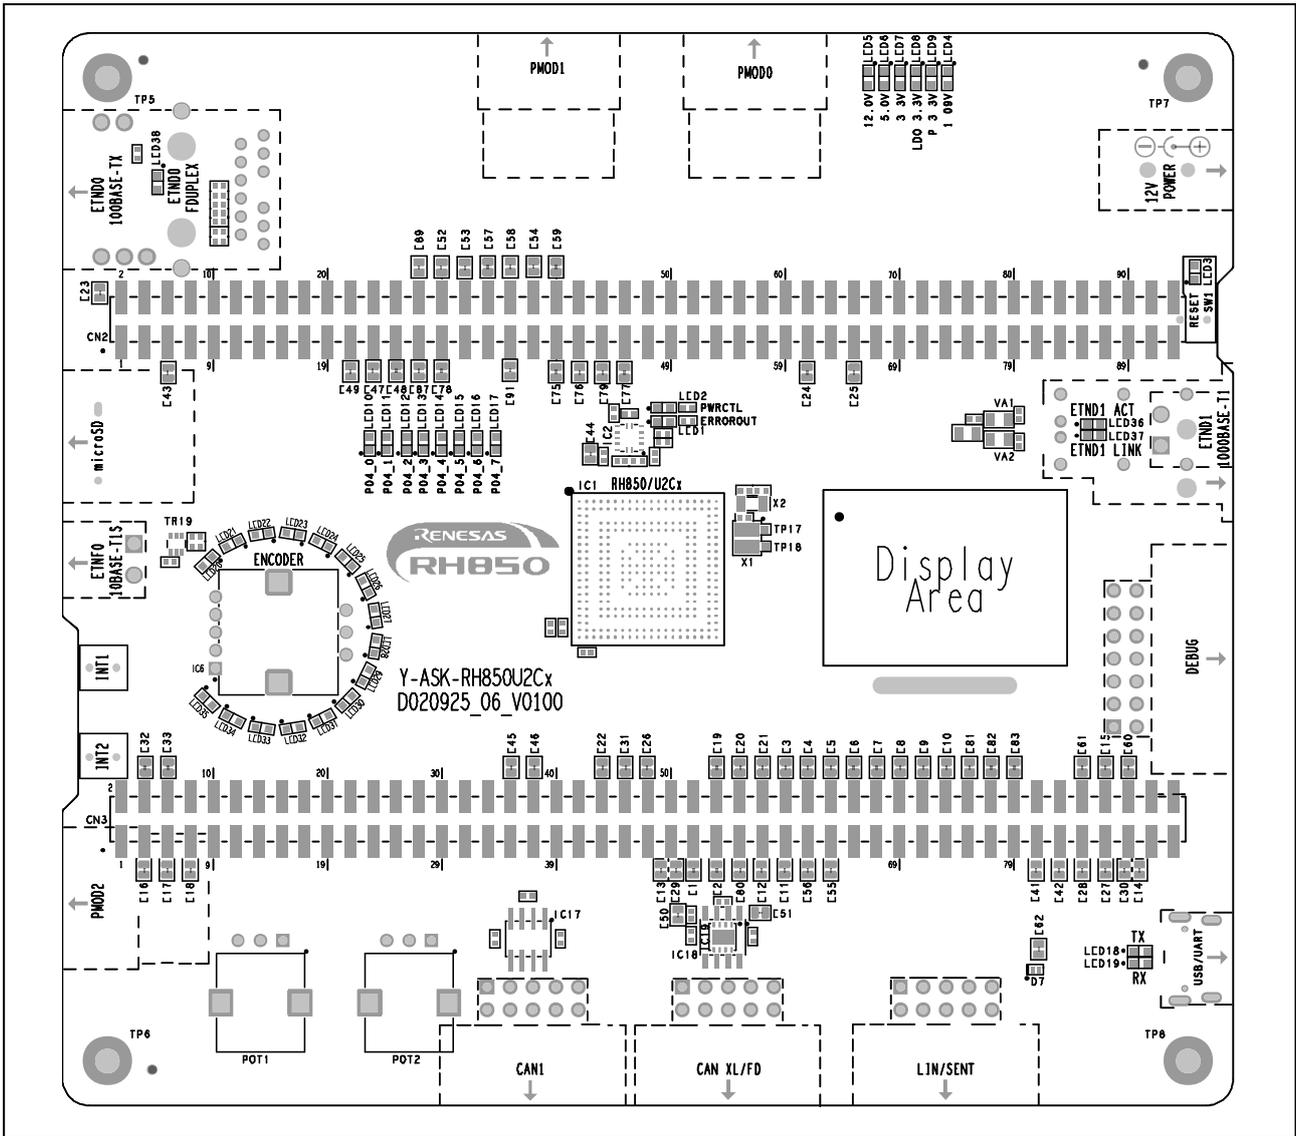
Starter kit board top view for board version D020925_06_V0100
